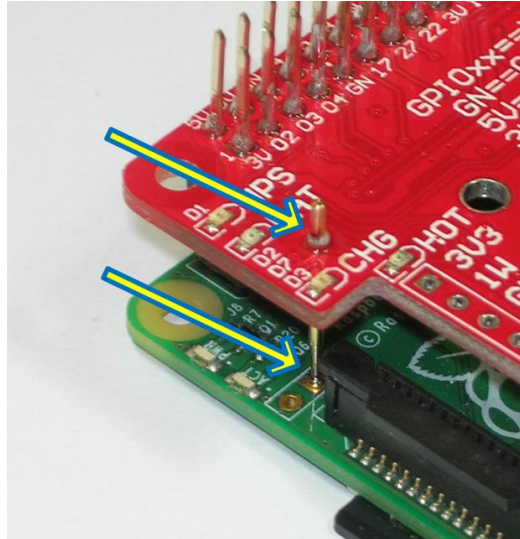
Gold Plater Reset Pin soldered on the UPS Pico
